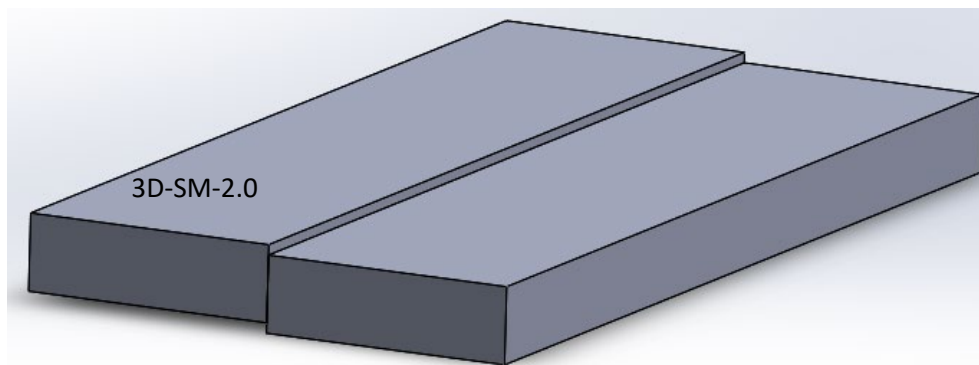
Step misalignment defect of 2 mm error along the weld region of thick SS plates.
